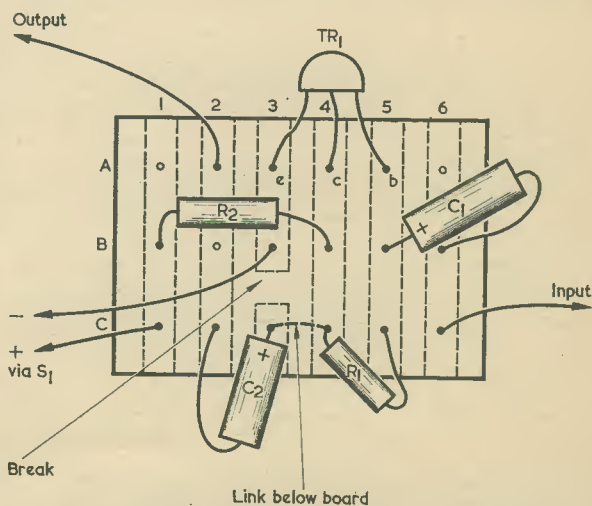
The components mounted on a small piece of Veroboard. In this view the copper strips are underneath the board and the components above
